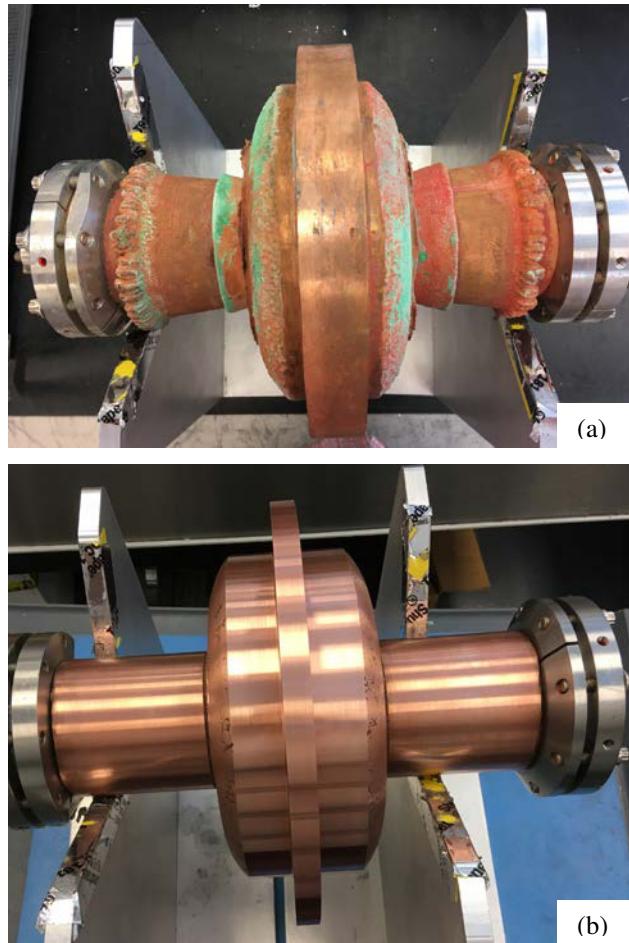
Single-cell cavity after Cu-plating (a) and machining (b).
